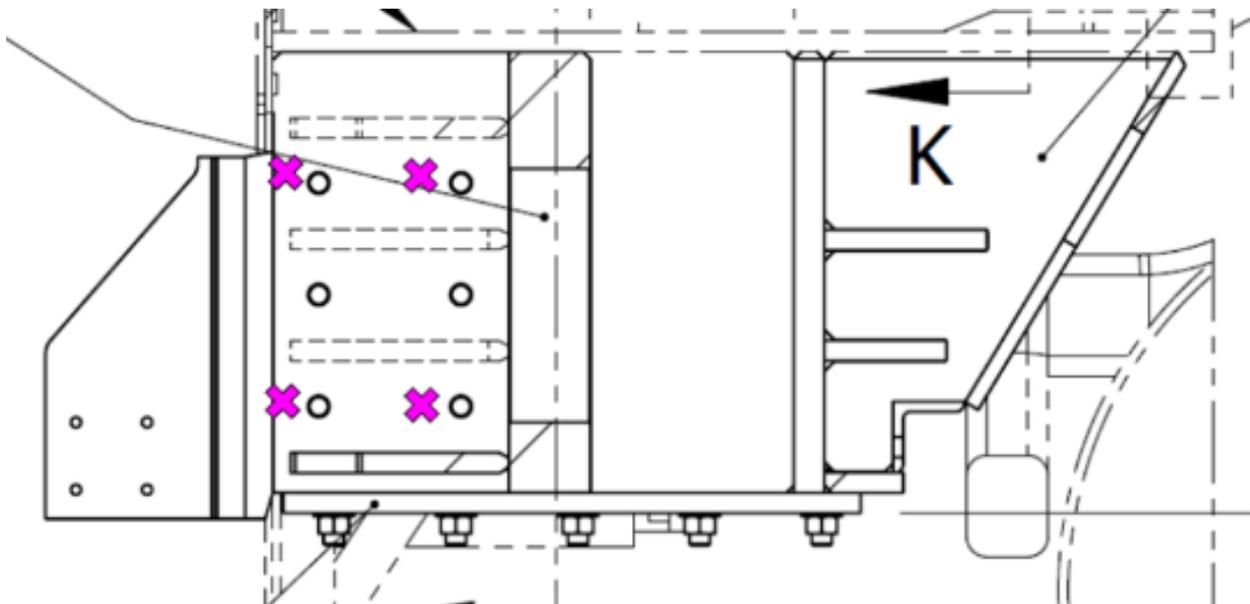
Strain Gage Locations on CEM Locomotive Sliding Lug
